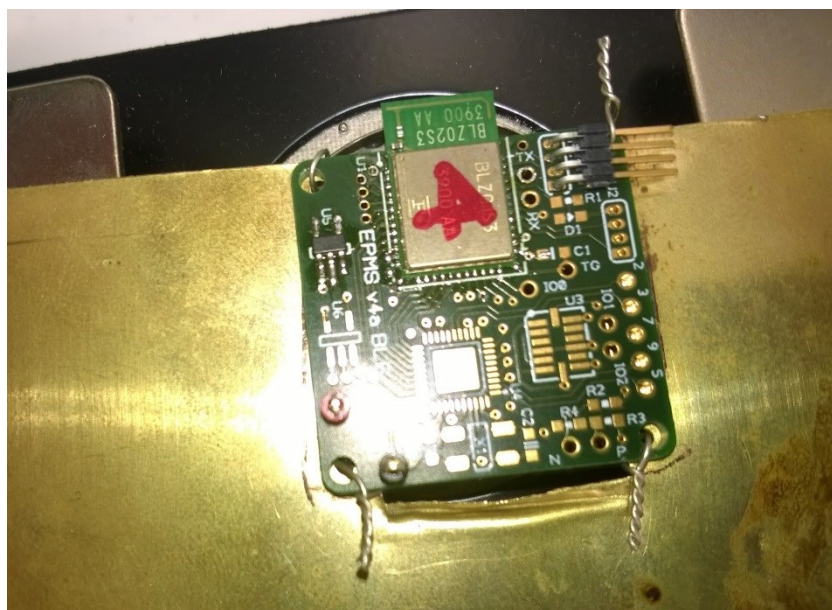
An EPMS v4 pcb wired on to the holder and positioned over the Tenma hot plate for reflow soldering.
